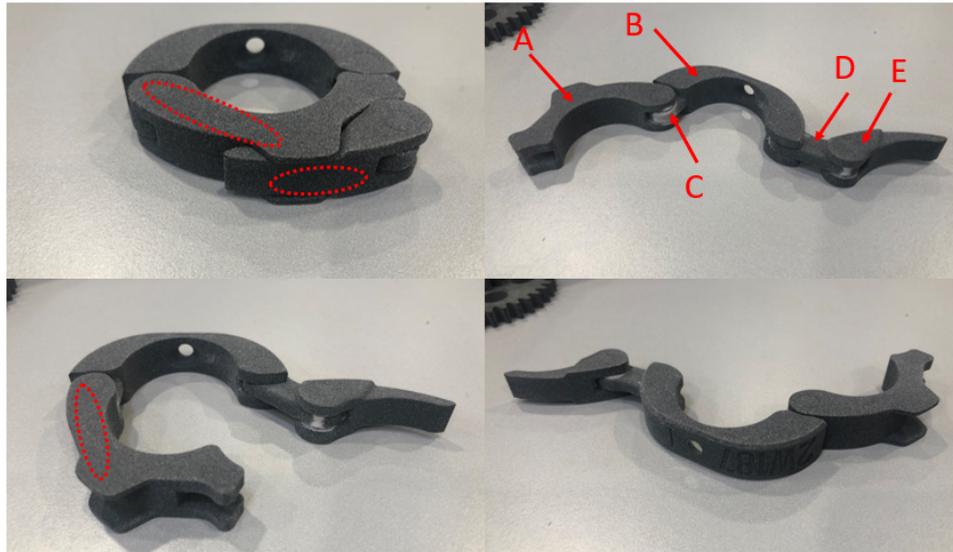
An assembly, its composing parts and relative positions. Note that assembly shown is composed of five different parts labelled as A, B, C, D and E. Label location is not obvious according to its functional movements. Red ellipses highlight suitable labeling locations.
